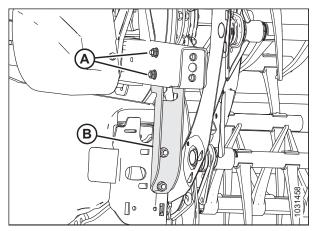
Outboard Reel Arm Support – D1XL Header Shown
